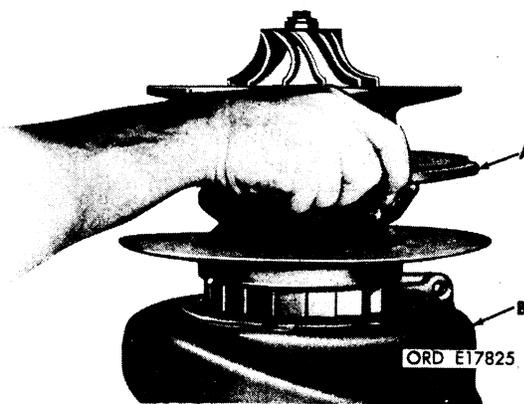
REMOVING BEARING HOUSING ASSEMBLY AND RELATED PARTS - TURBOCHARGERS 7748900 AND 10935279.
